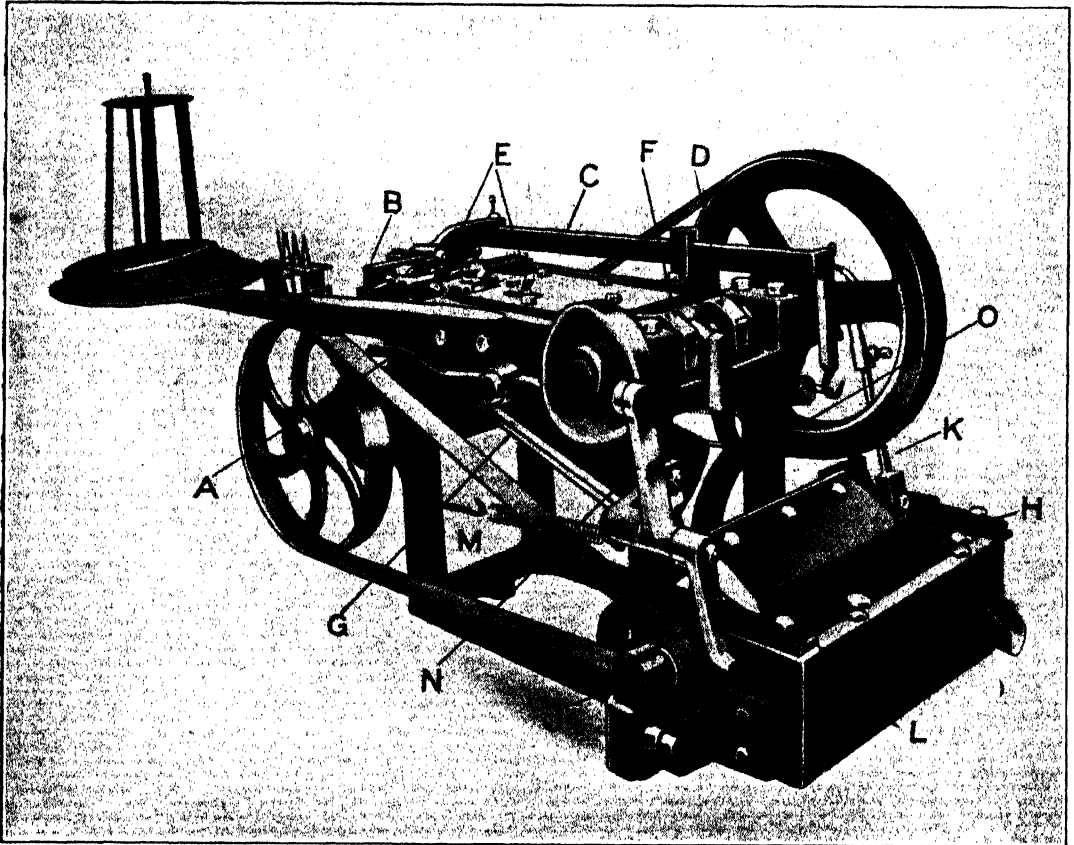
AUTOMATIC PIN-MAKING MACHINE—E. WHITE.
